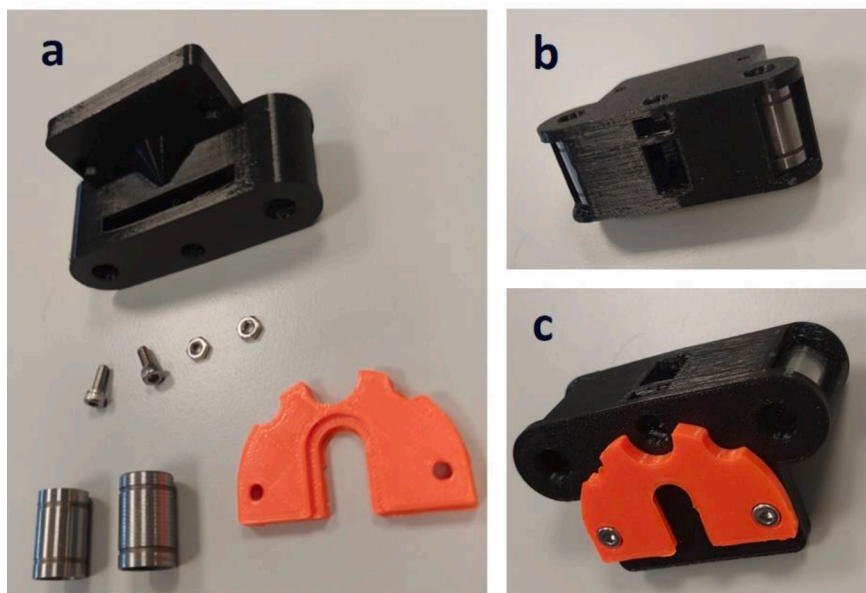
Setting up the carriage for transferring linear motion to the syringe: (a) Exploded view of the components. (b) ball bearings were installed in the carriage. (c) The clamp syringe retainer attached to the carriage.
